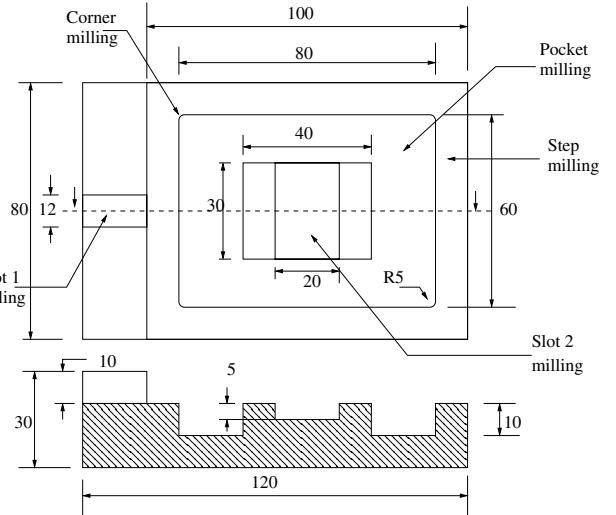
Final design of workpiece that is manufactured using five milling operations.
